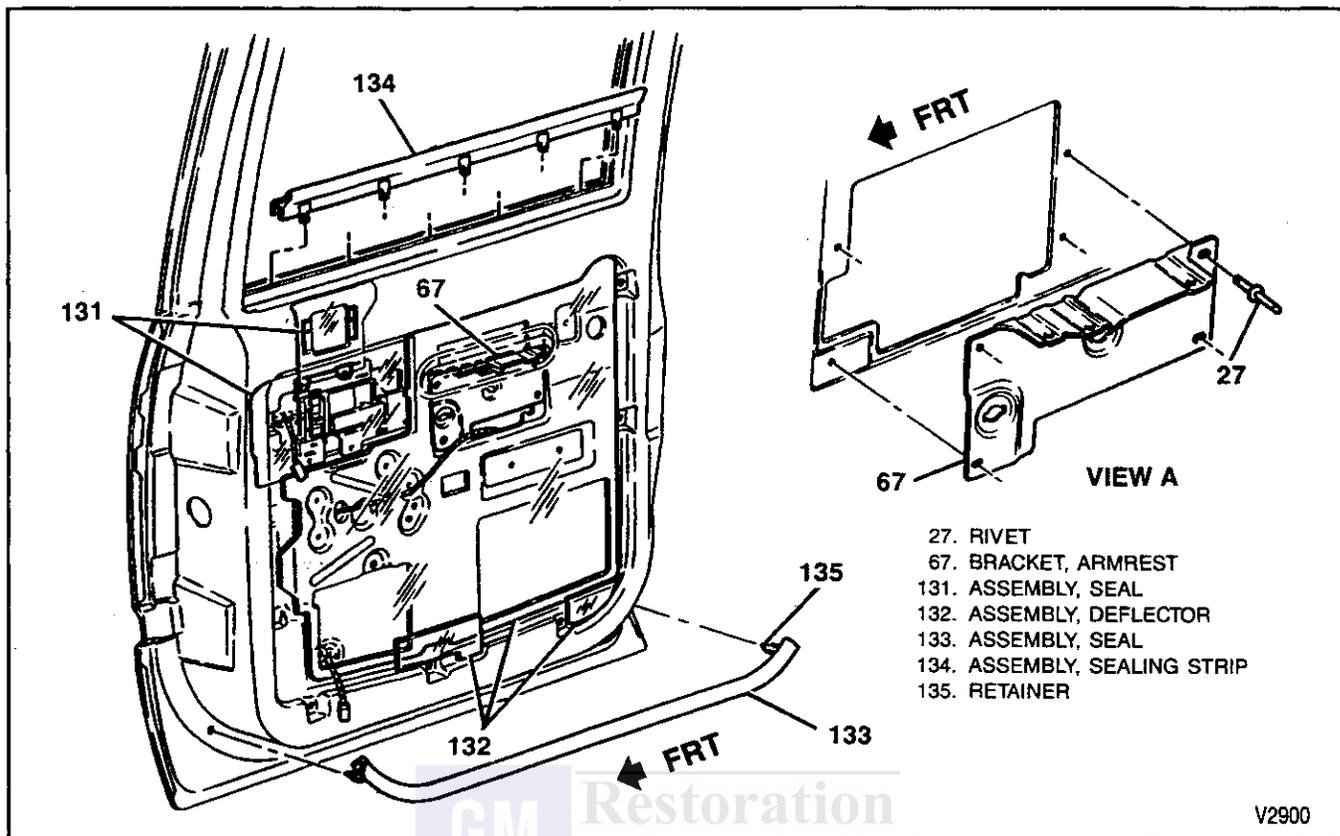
Rear Side Door Outer Belt Window Seal and Lower Door Seal Assembly
